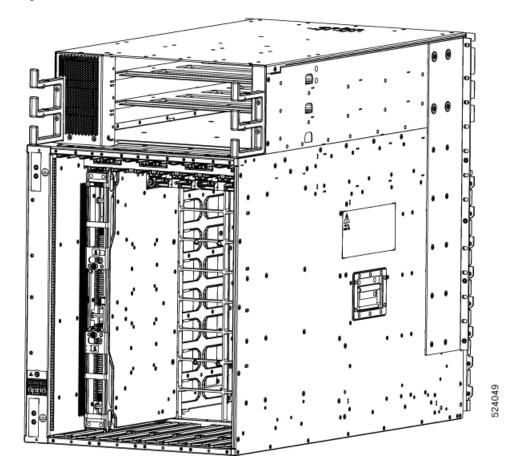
Fabric Card Installed in a Chassis - 8808-FC1
